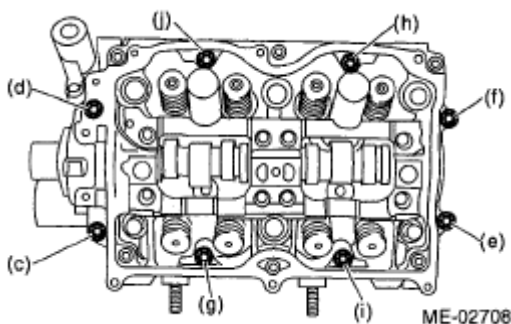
Removing Sequence Of Camshaft Cap Bolts
